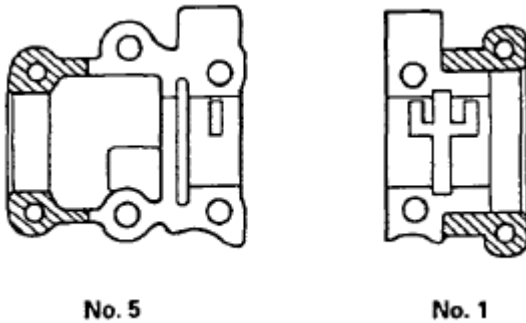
Applying Liquid Gasket To Head Mating Surfaces Of No. 1 And No. 5 Camshaft Holders
